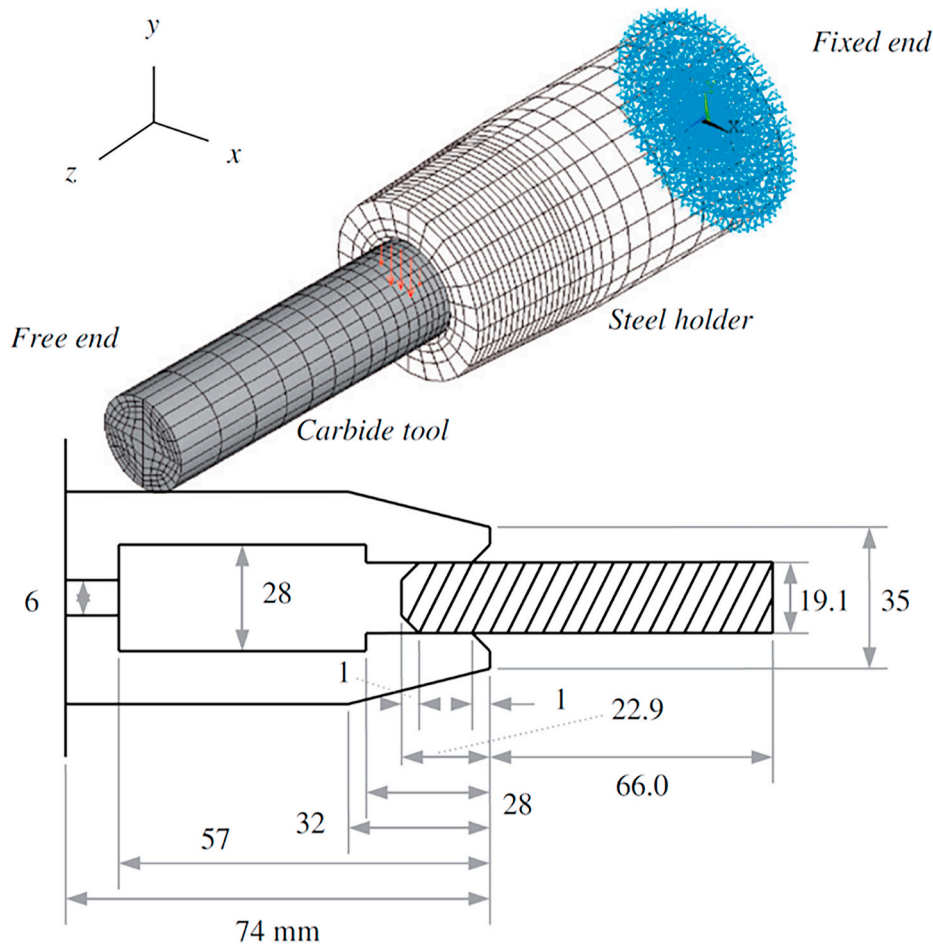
Finite element model for 19.1 mm diameter carbide tool blank inserted in steel tapered shrink fit holder. The base of the holder was held fixed, while the end of the tool was unsupported [57].
